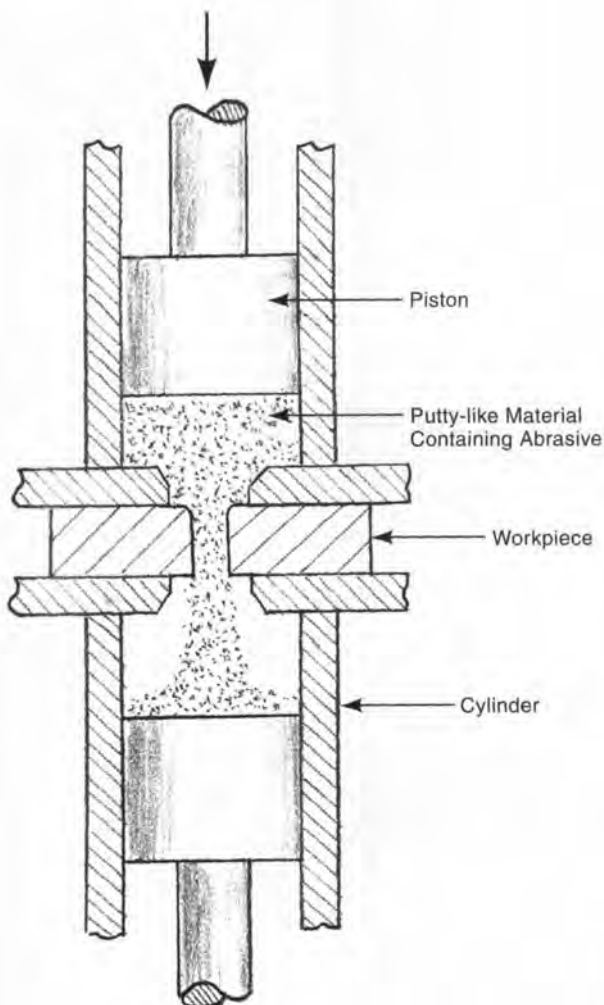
K1 Abrasive flow deburring. Reciprocating movement of the pistons forces the putty-like material containing abrasive particles, back and forth against the workpiece, removing burrs and smoothing the surface.
